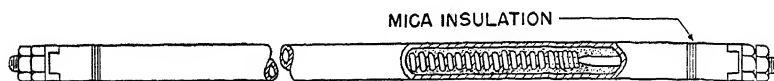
Rod type resistor. (Courtesy General Electric Company.)
